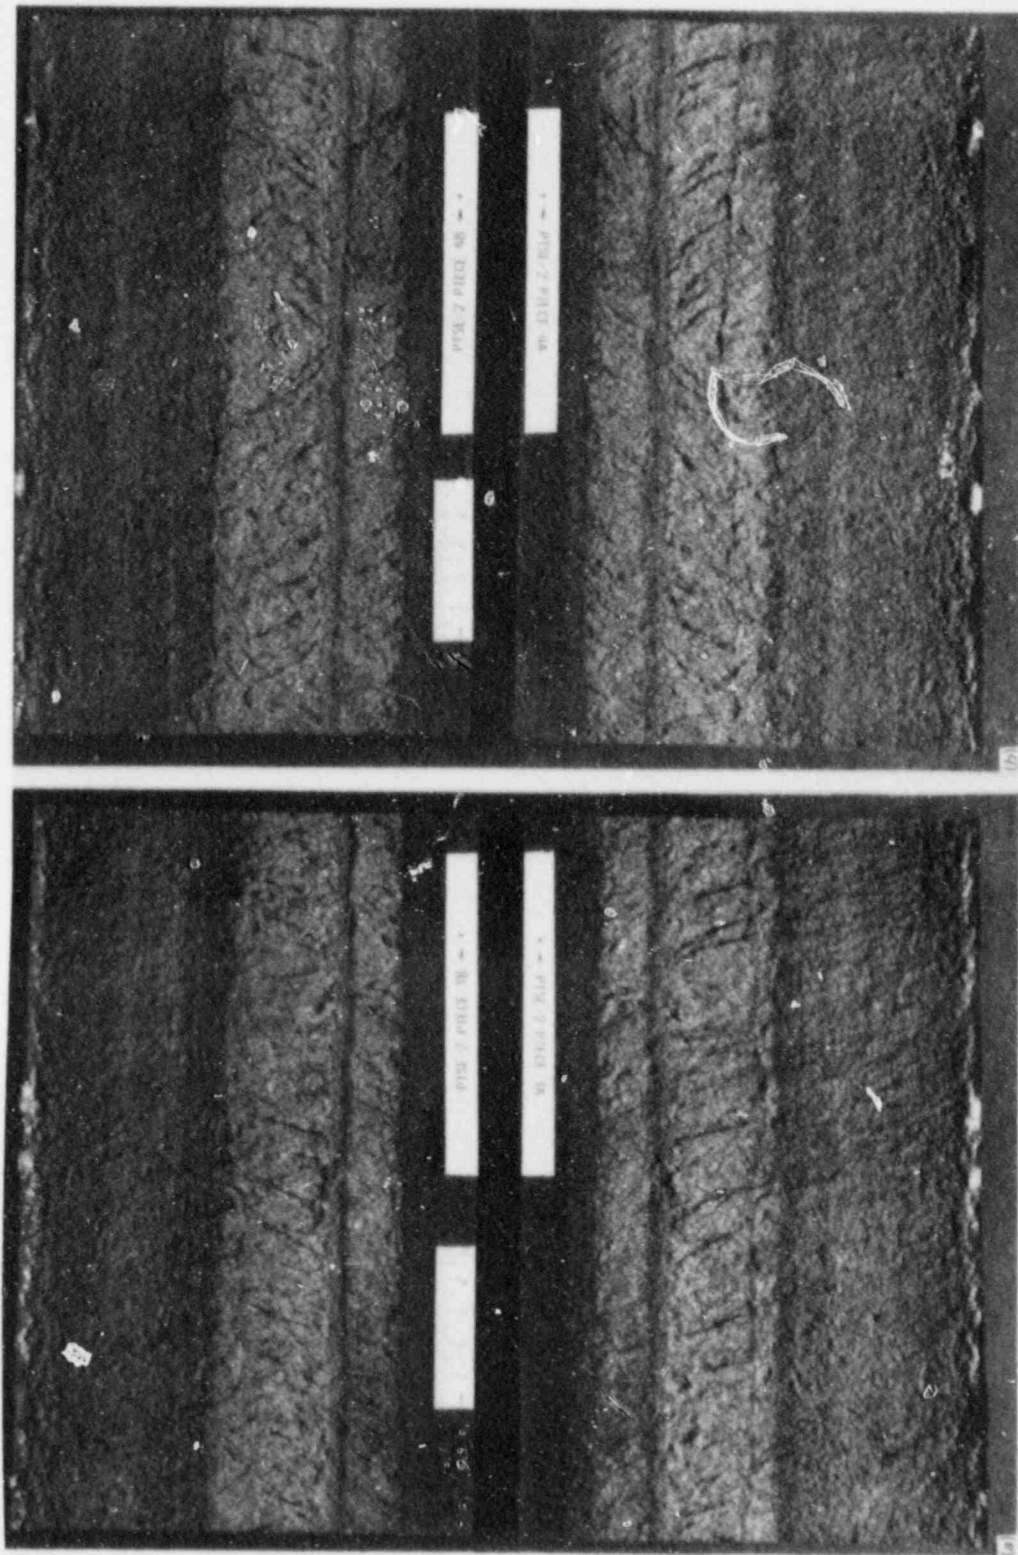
Photographs of mating fracture surfaces in (a) segment 3 and (b) segment 4.
